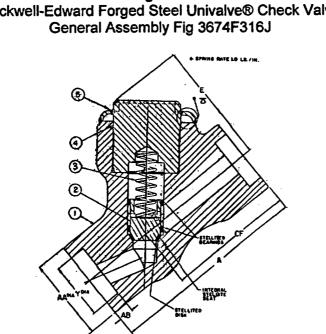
Rockwell-Edward Forged Steel Univalve® Check Valve General Assembly Fig 3674F316J
